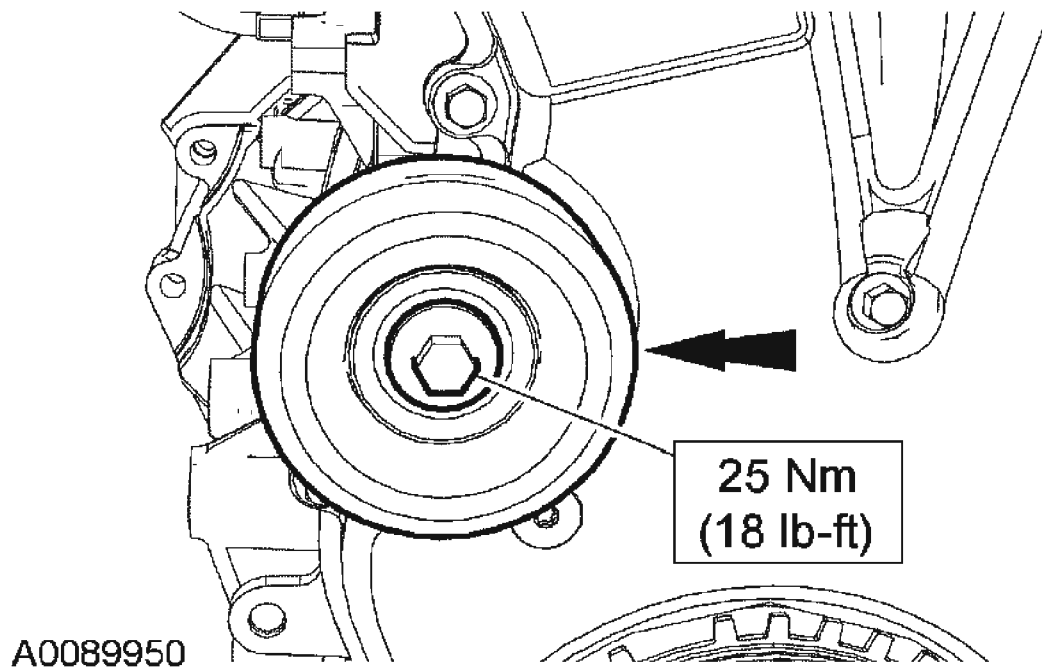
Installing Accessory Drive Belt Idler Pulley And Bolt
